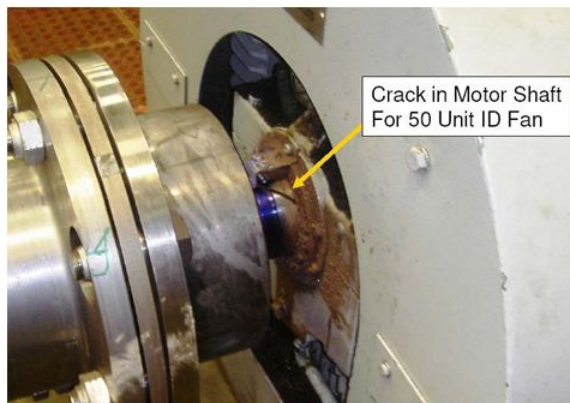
Motor Shaft Failure Induced by VFD System [3]
